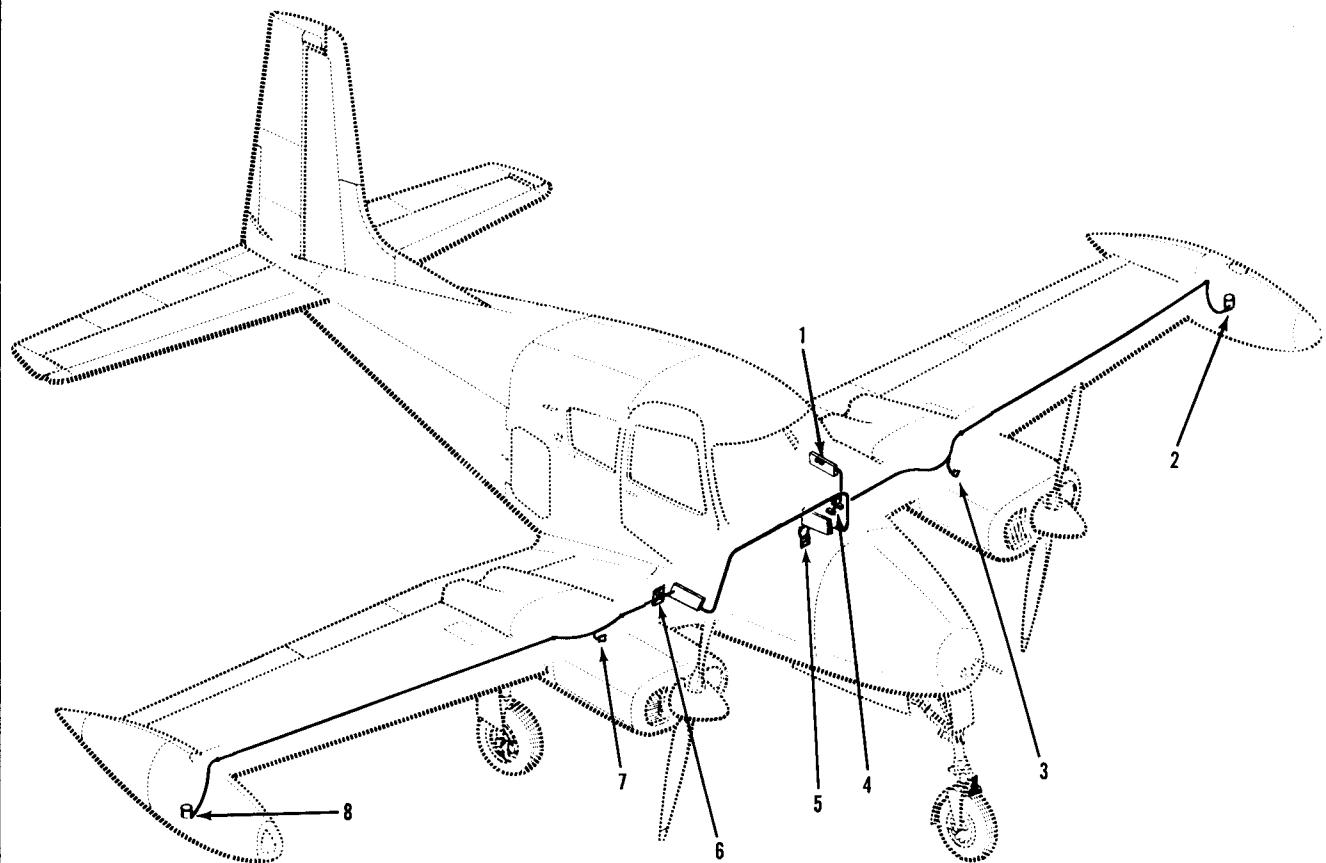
Fuel Boost and Auxiliary Fuel Pump Circuit (Sheet 2 of 3)
